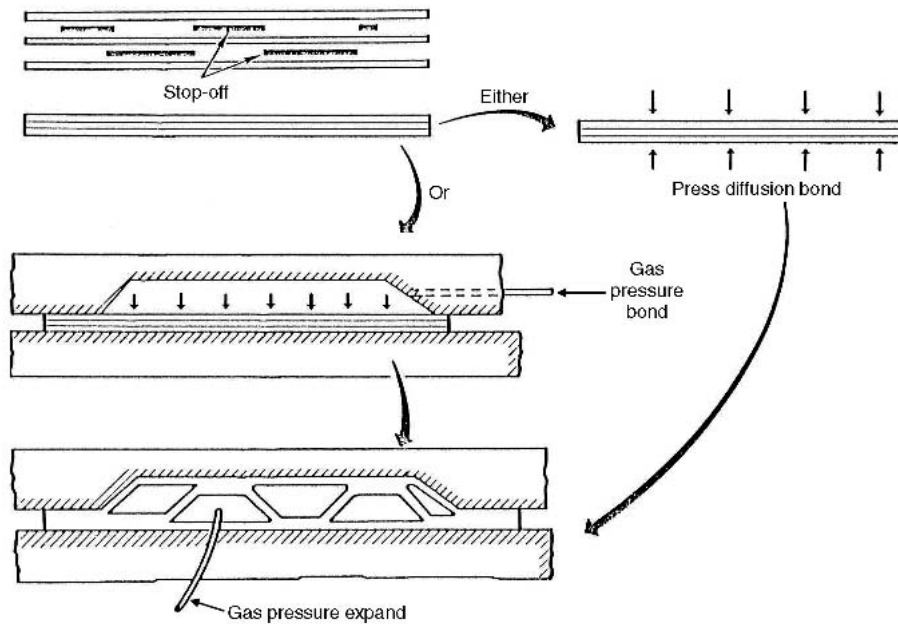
The Rockwell SPF/DB methods of fabricating SPF/DB panels using gas pressure or mechanical press bonding
